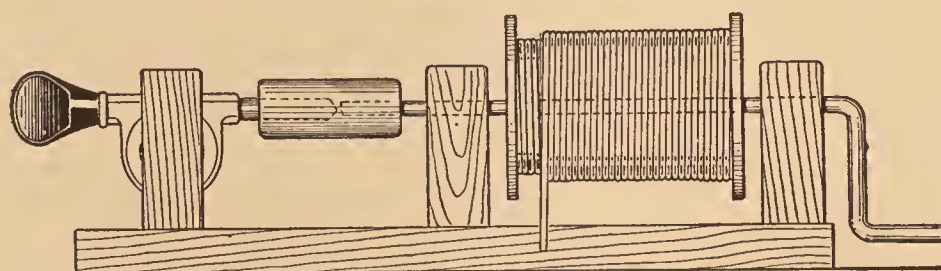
ATTACHED TO WOODEN WINDING JIG
